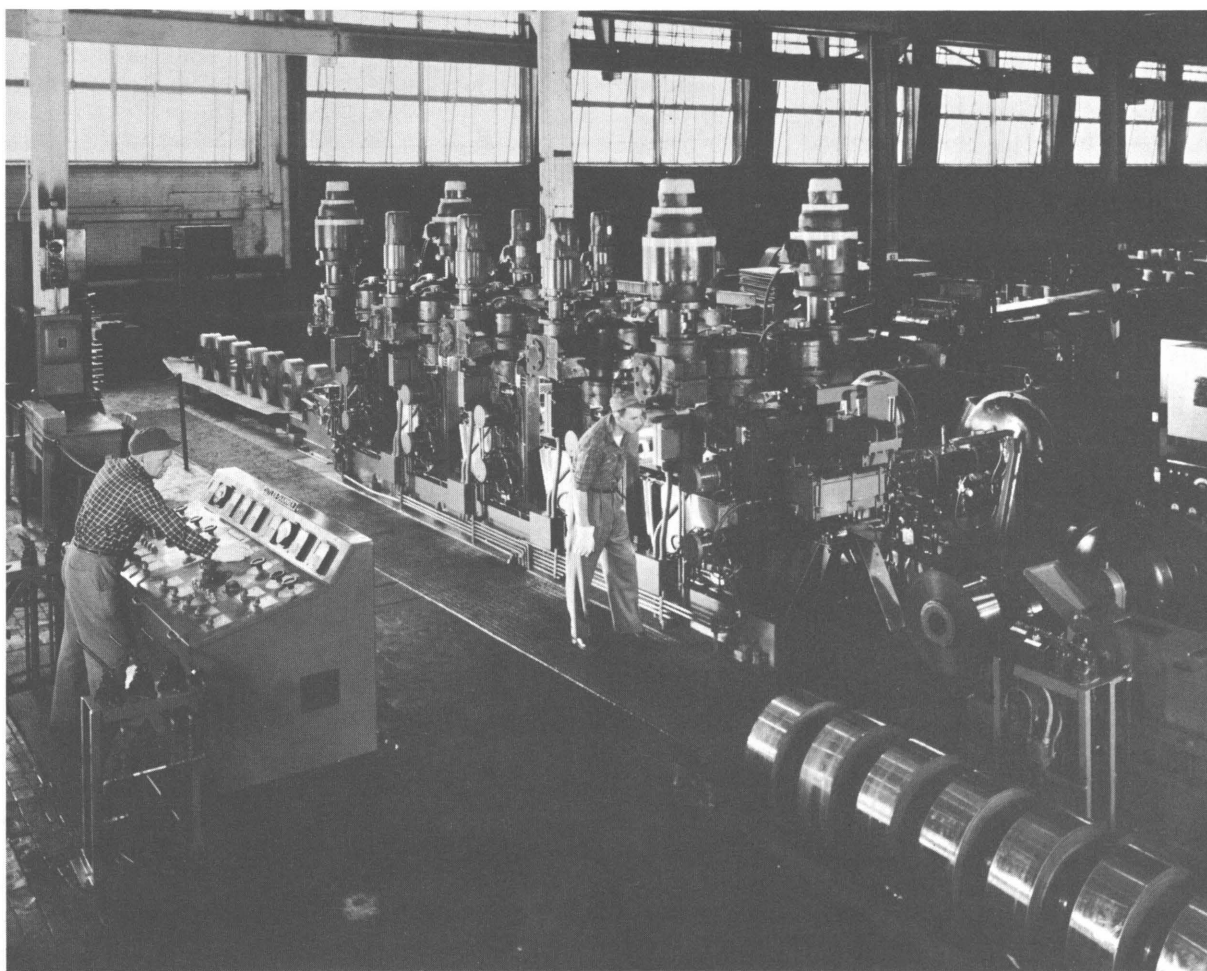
Rolling Close-Tolerance Strip Metal.
